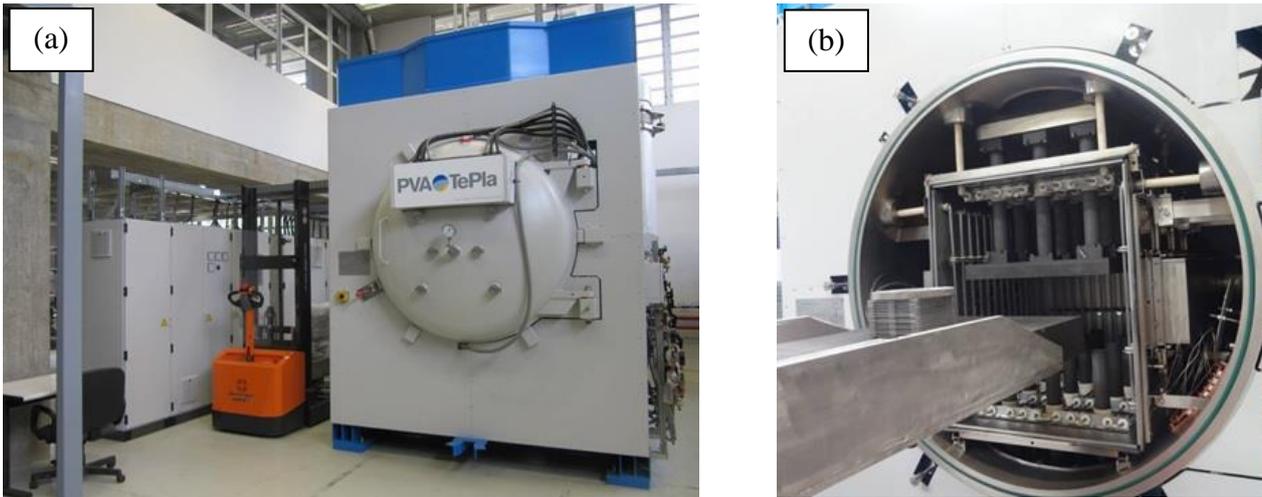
(a) Hot press furnace and (b) chamber for diffusion bonding of the Heat Pipe Laboratory/UFSC
